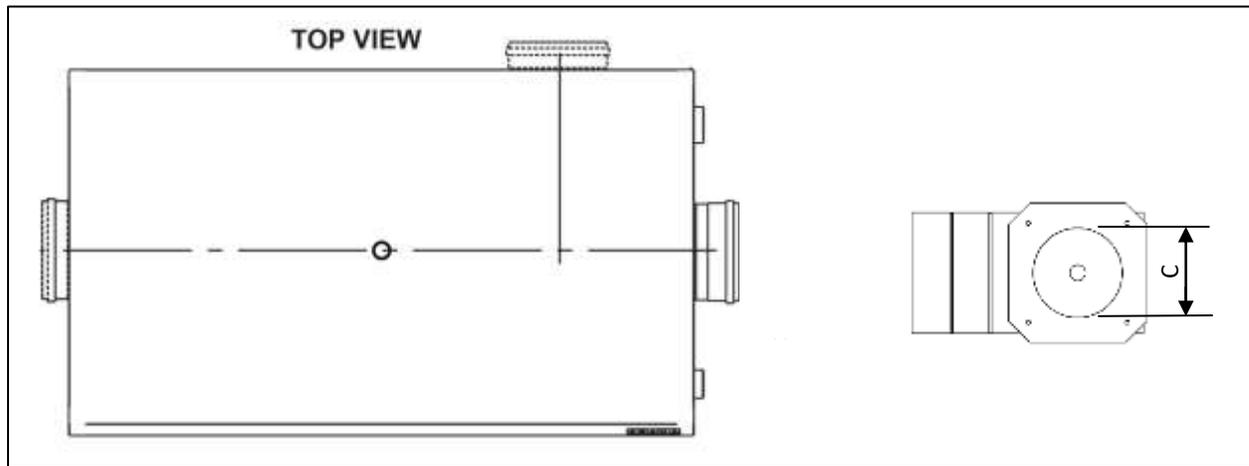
MODULEX EXT and Vent Adaptor Dimensional Drawings (Top View)
